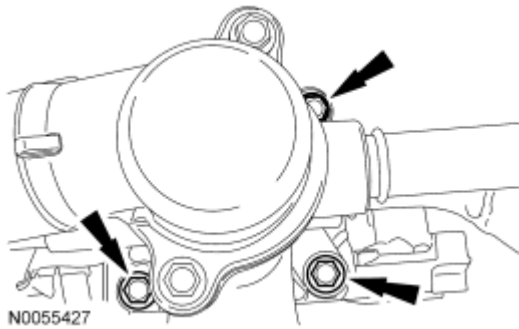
Locating Thermostat Housing-To-Lower Intake Manifold Bolts
